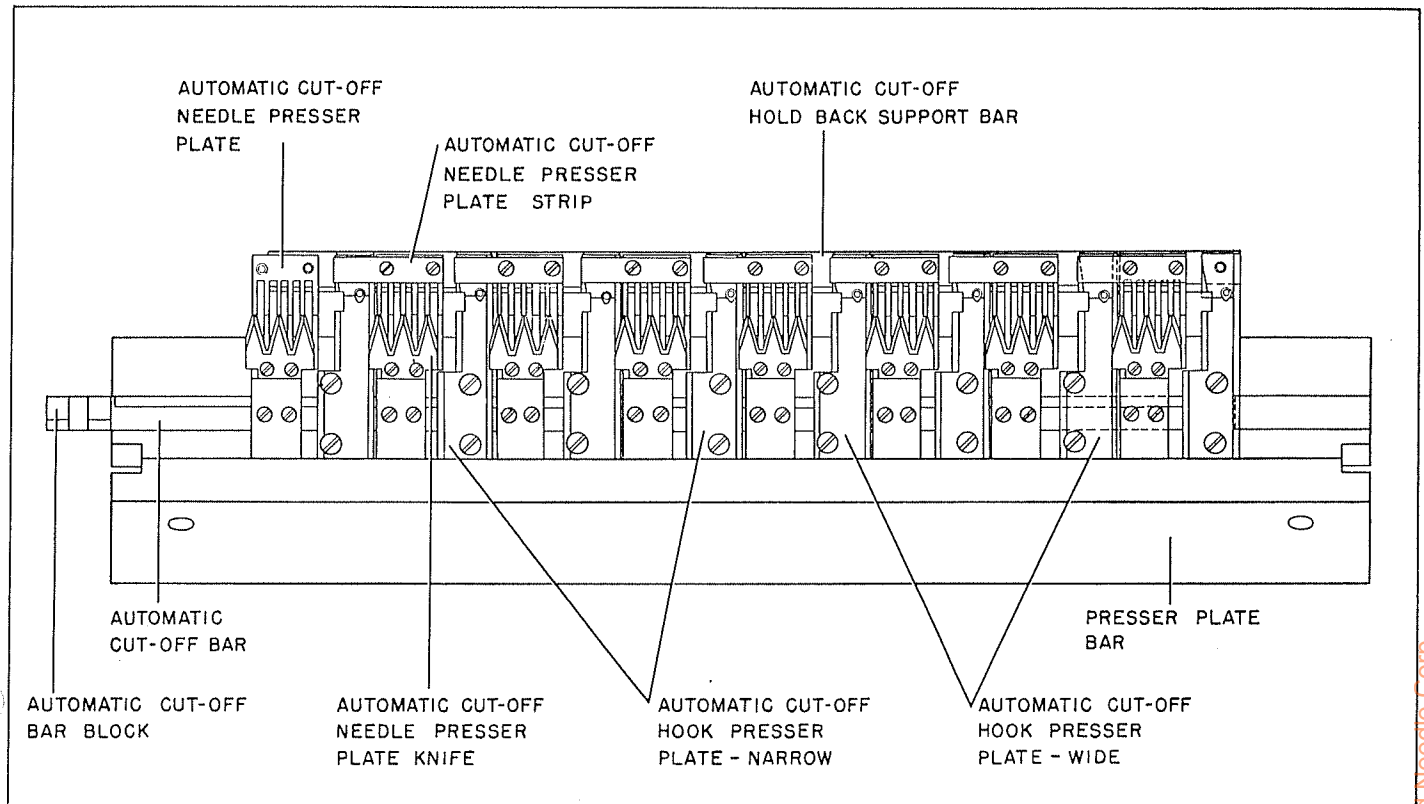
Automatic Cut-Off Presser Plate Bar Assembly
